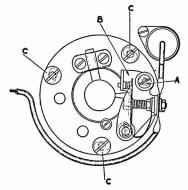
View of models 4F. 6F and 9F breaker point assembly.
